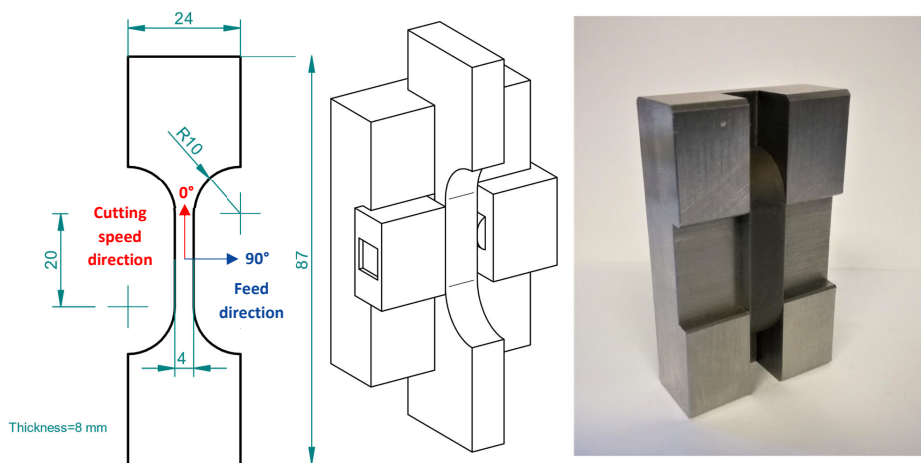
From left to right: sketch with specimen dimensions, sketch of the assembly with the specimen, pads, and alignment tool during application of normal load and picture of the alignment tool.
